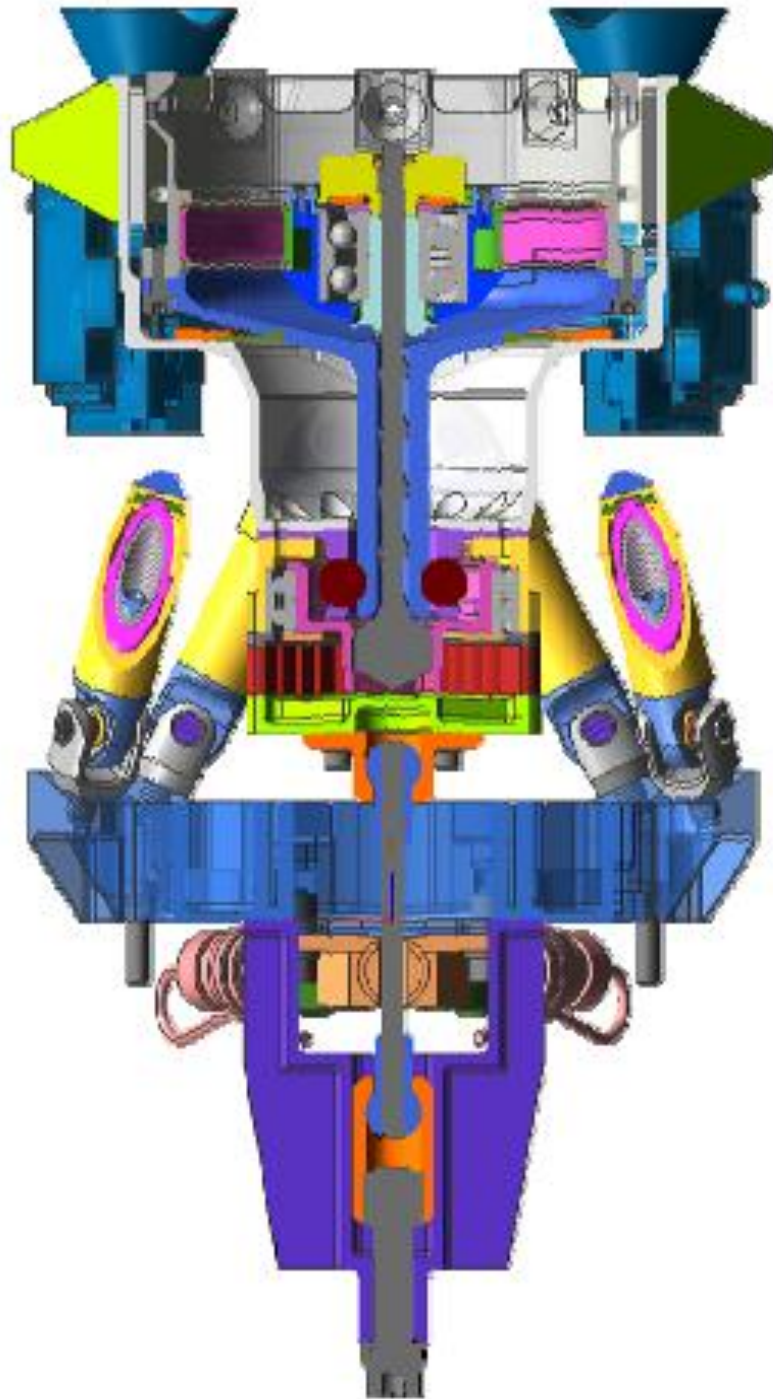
Tensioned Launch-Lock Assembly, Section View
